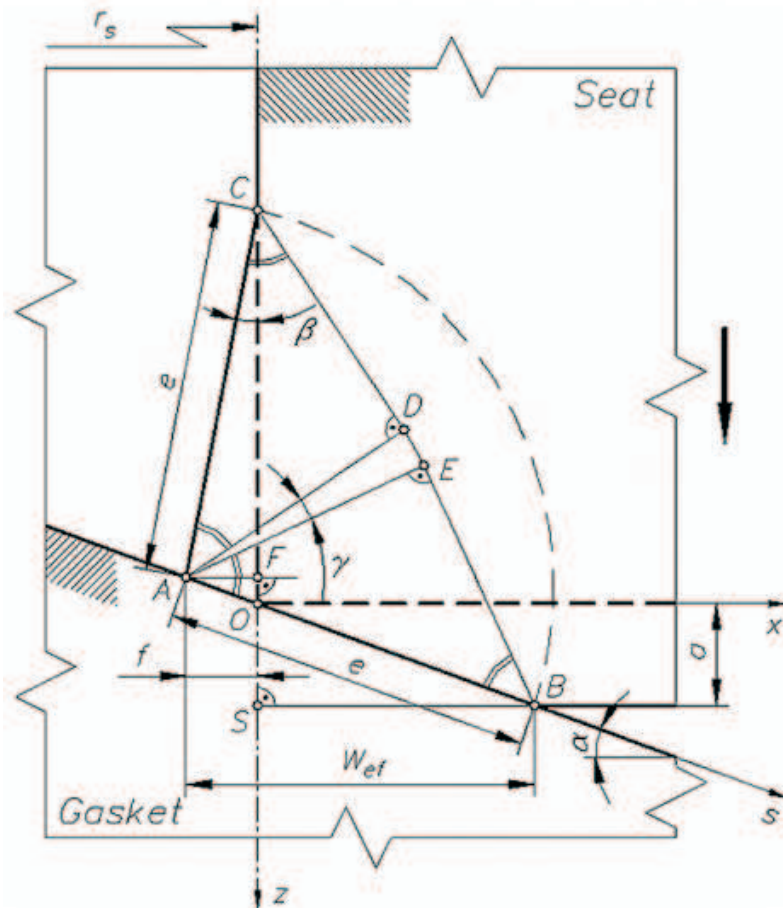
Dislocation of material and geometry of the deformed seat compressed by a rigid gasket – part of the contact surface
